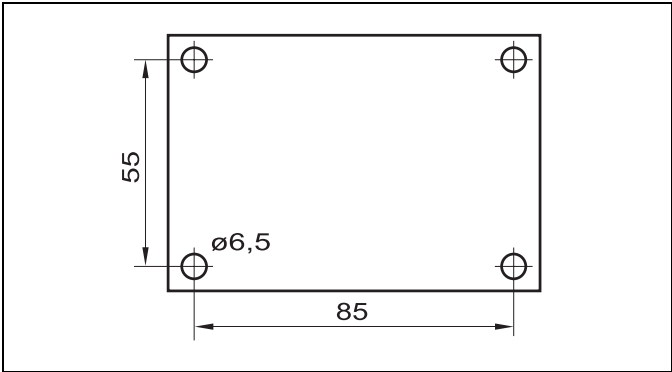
Hole pattern for the stand for U 4814 circulating pump
